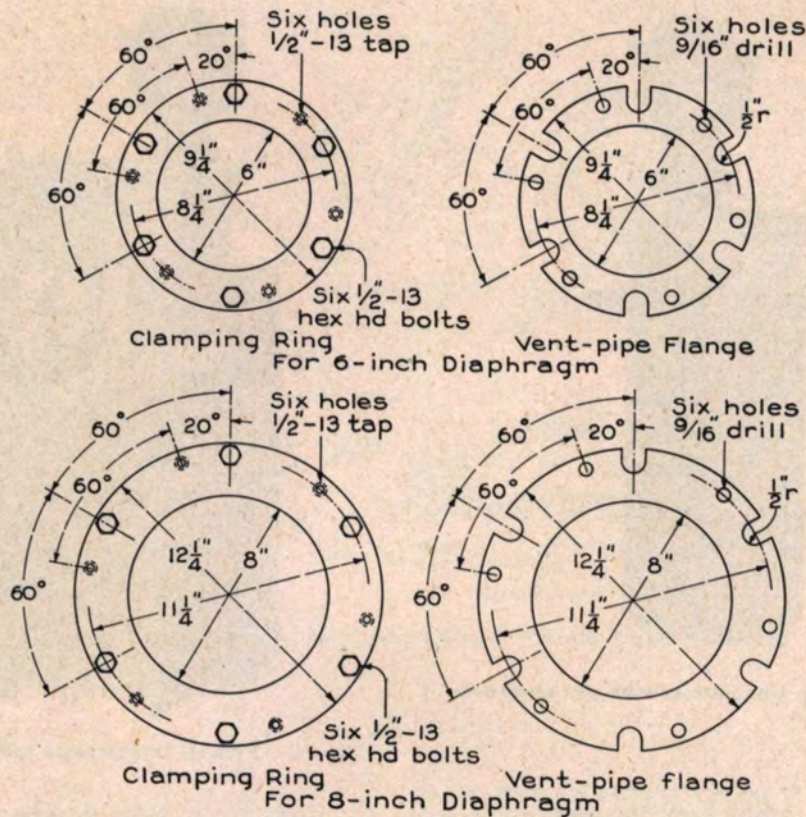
Vent Pipe Flange Outlines and Dimensions
